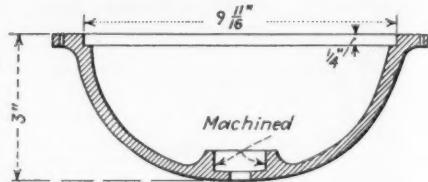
Cross-section of Baldor end plate showing part to be machined
